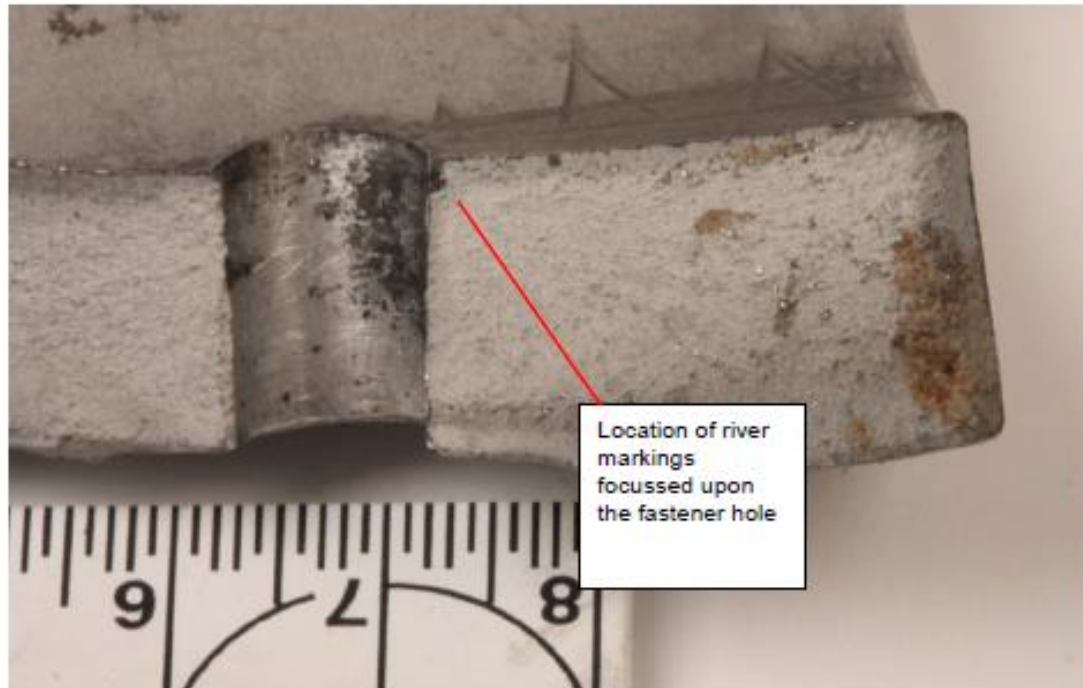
Showing the detail of fracture surface 'B1'.
